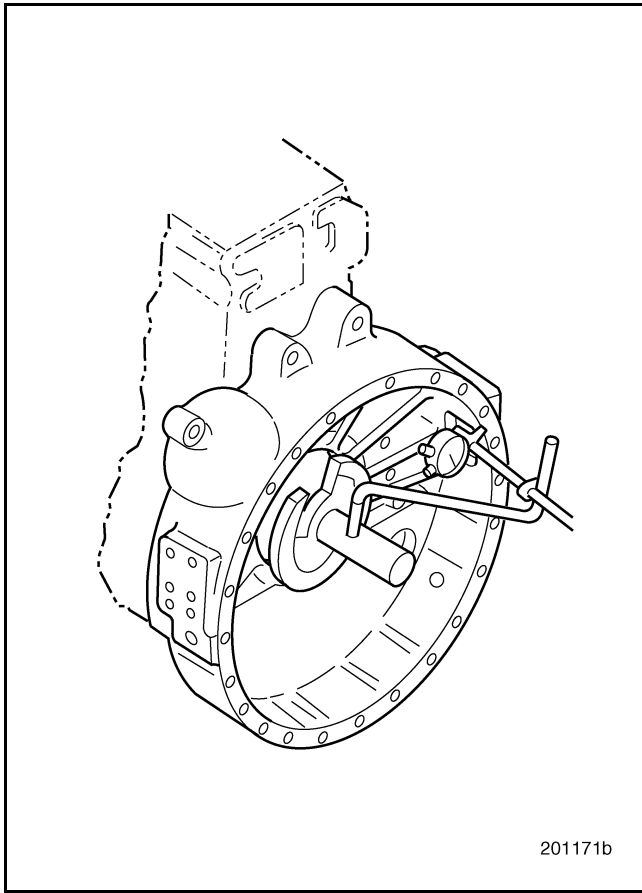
Flywheel Housing Runout Check with Dial Indicator
